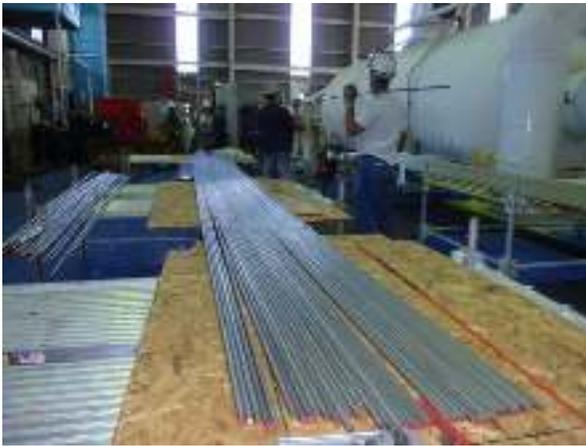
5/8" OD SS bars to protect new tubes.      Fig. 16. Welded bar stock to last tube support.
